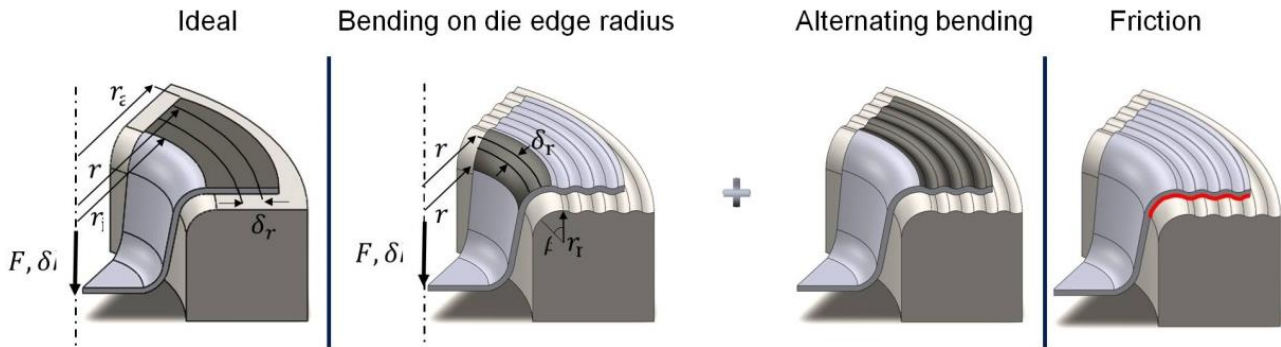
Calculation of energy parts for deep drawing with macro-structured tools.
